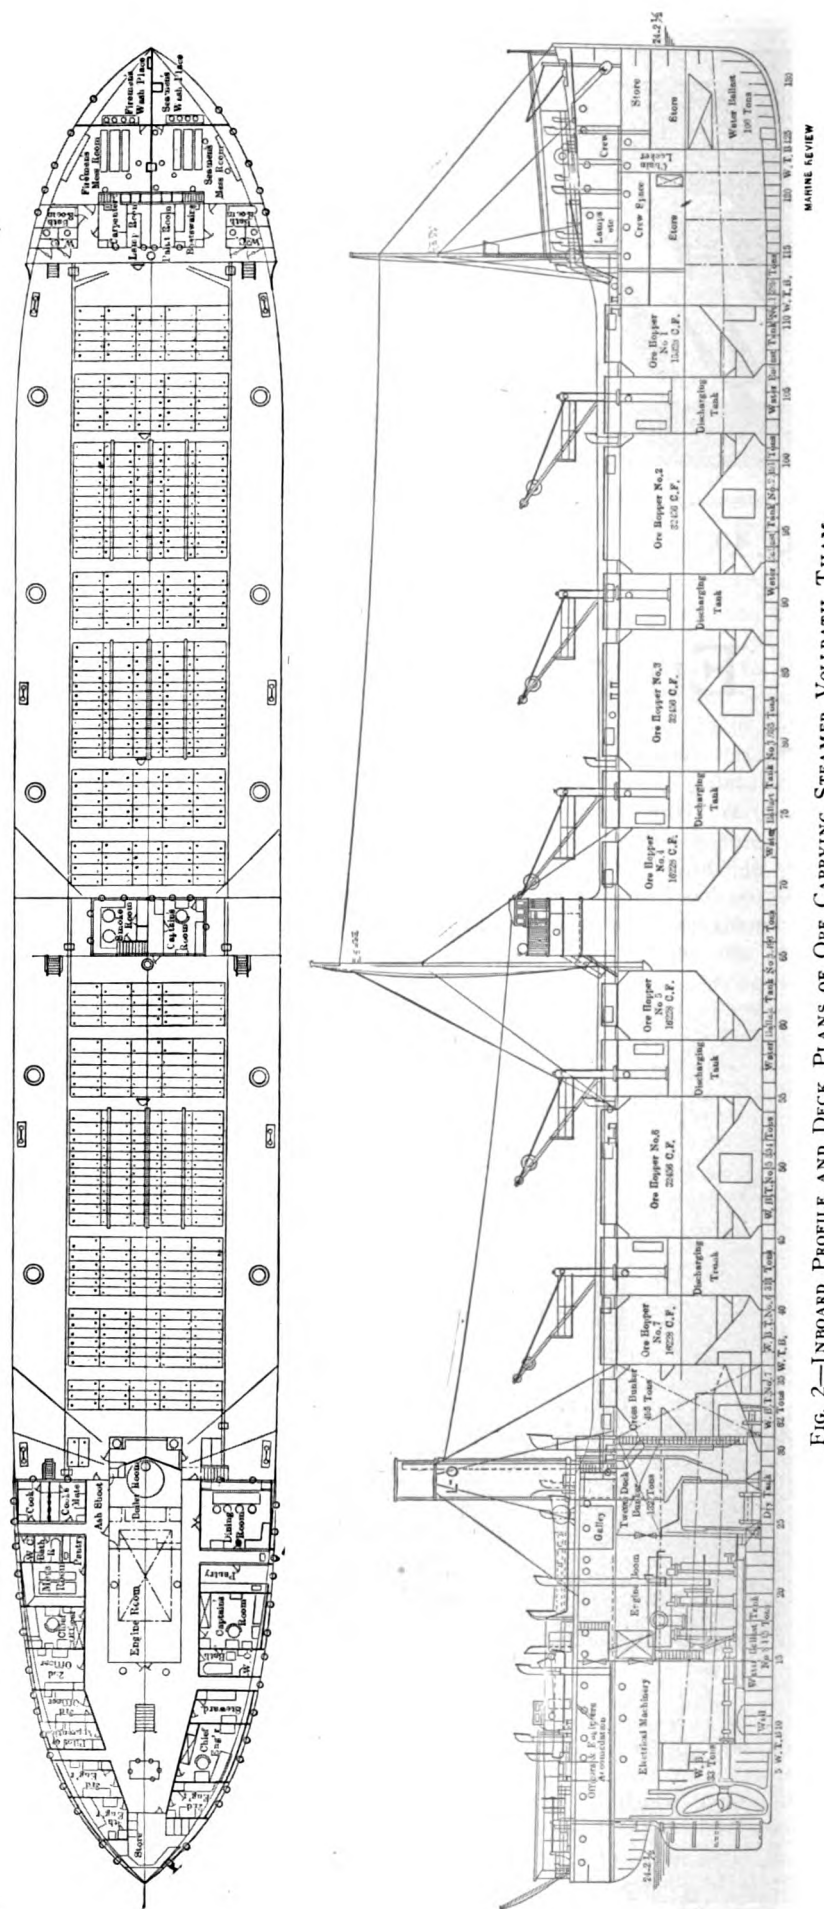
INBOARD PROFILE AND DECK PLANS OF ORE CARRYING STEAMER VOLLRATH THAM.
